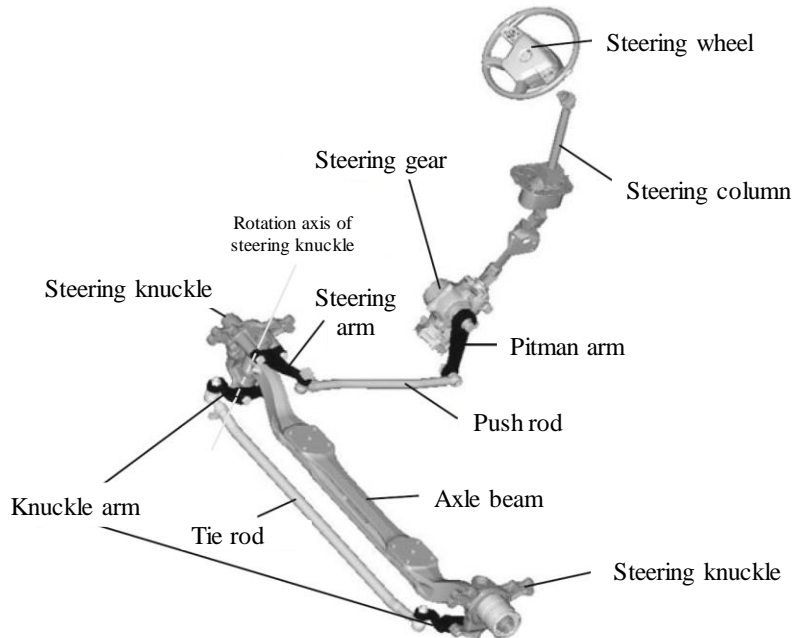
Exemplary truck steering system with steering kinematic and RCB steering gear<sup>26</sup>
